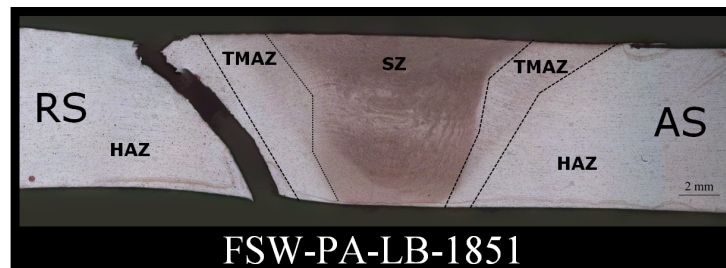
Macro-morphology of the FSW-PA-LB-1851 weld fracture.
